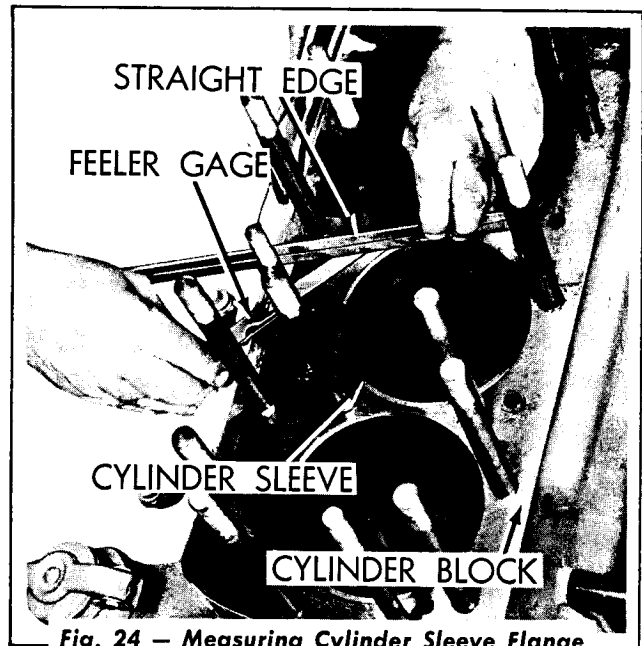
Measuring Cylinder Sleeve Flange Height Above Block
